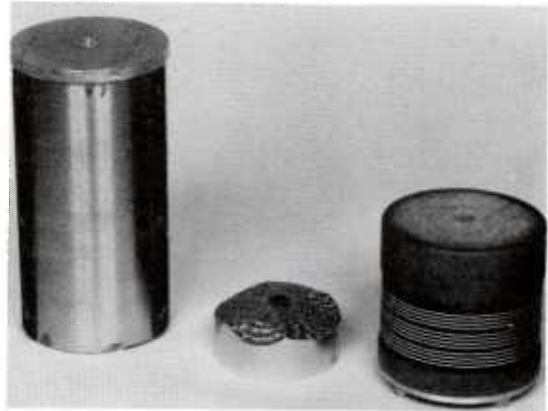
Components for  $16 \times 10^6$ -g set-back.
